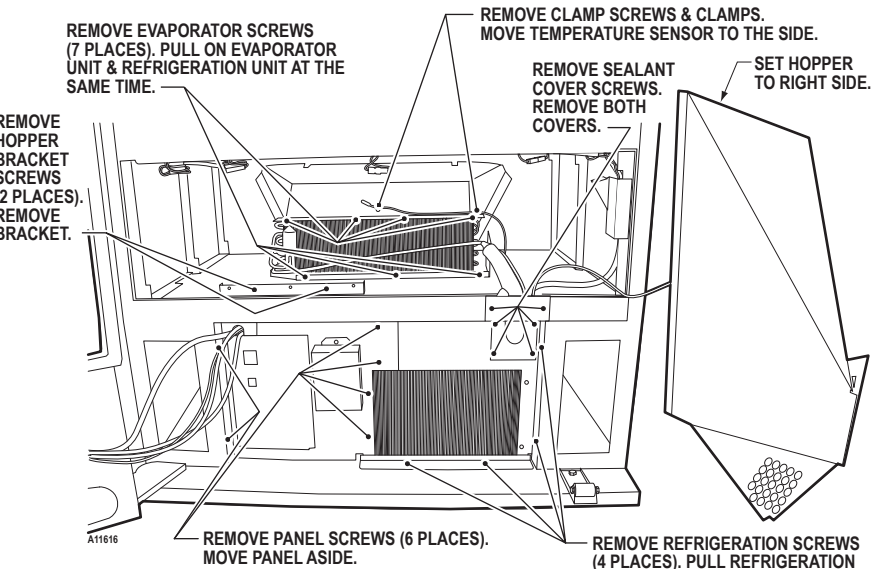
SET HOPPER ASIDE & REMOVE SCREWS
